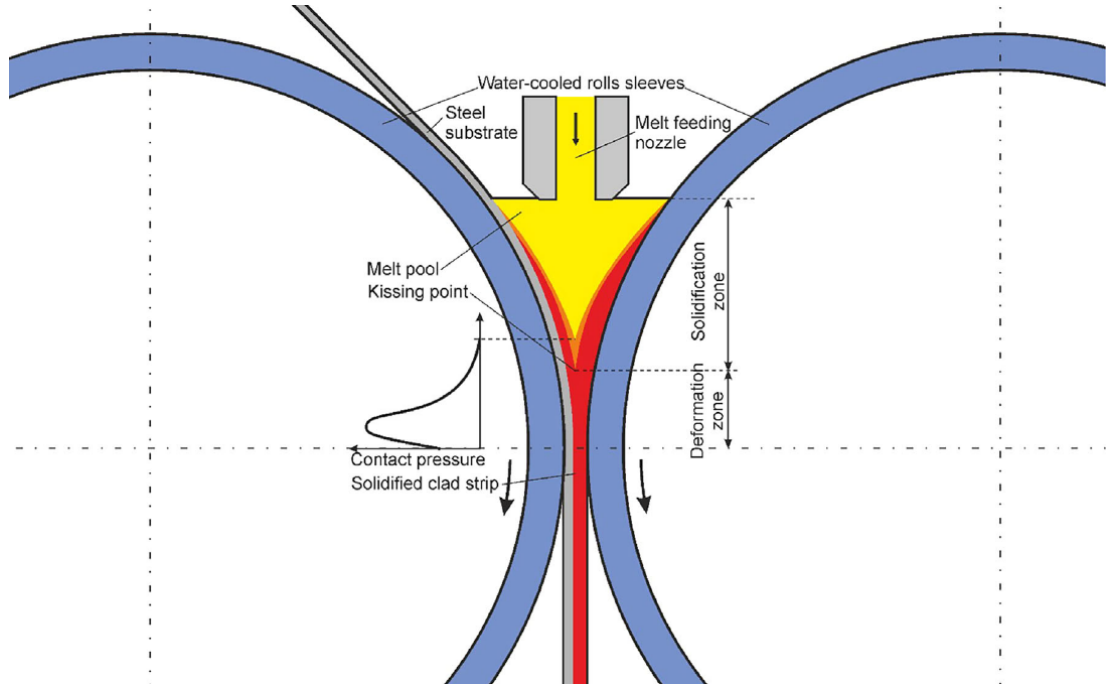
Scheme of twin-roll casting of clad strips [36]
